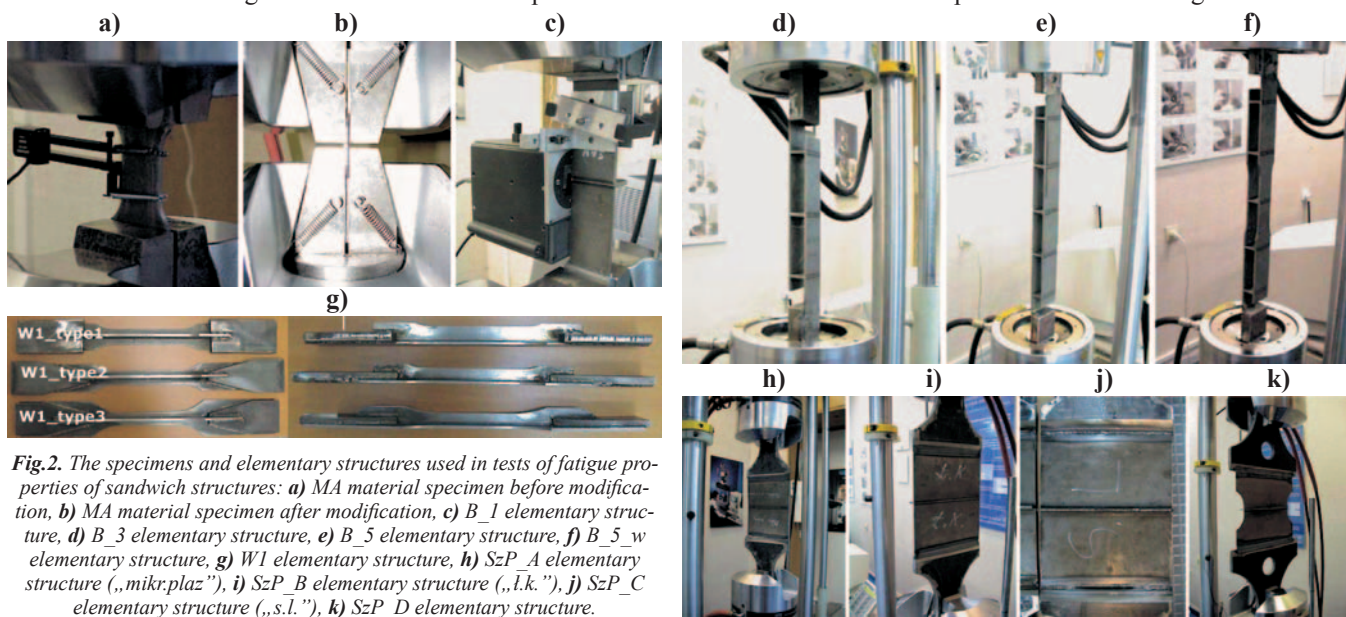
The specimens and elementary structures used in tests of fatigue properties of sandwich structures: a) MA material specimen before modification, b) MA material specimen after modification, c) B\_1 elementary structure, d) B\_3 elementary structure, e) B\_5 elementary structure, f) B\_5\_w elementary structure, g) W1 elementary structure, h) SzP\_A elementary structure („miks.plaz”), i) SzP\_B elementary structure („l.k.”), j) SzP\_C elementary structure („s.l.”), k) SzP\_D elementary structure.
